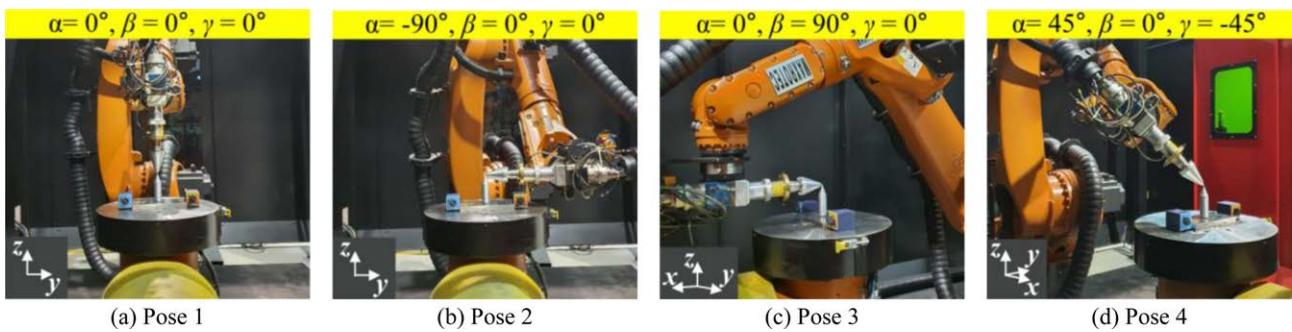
A TCP calibration of a 6-axis manipulator using a conical measuring fixture
